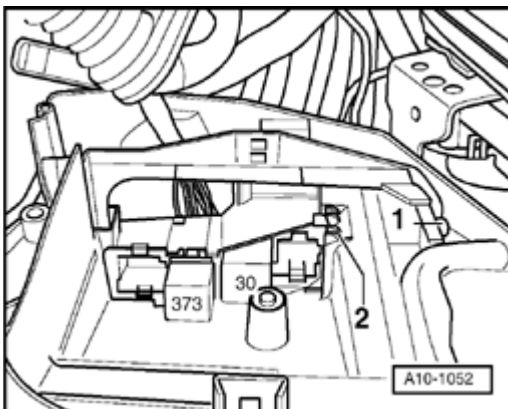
Releasing Catches, Lifting Off Control Module Support & Pulling Auxiliary Relay Carrier In Electronics Box Upward To Remove
